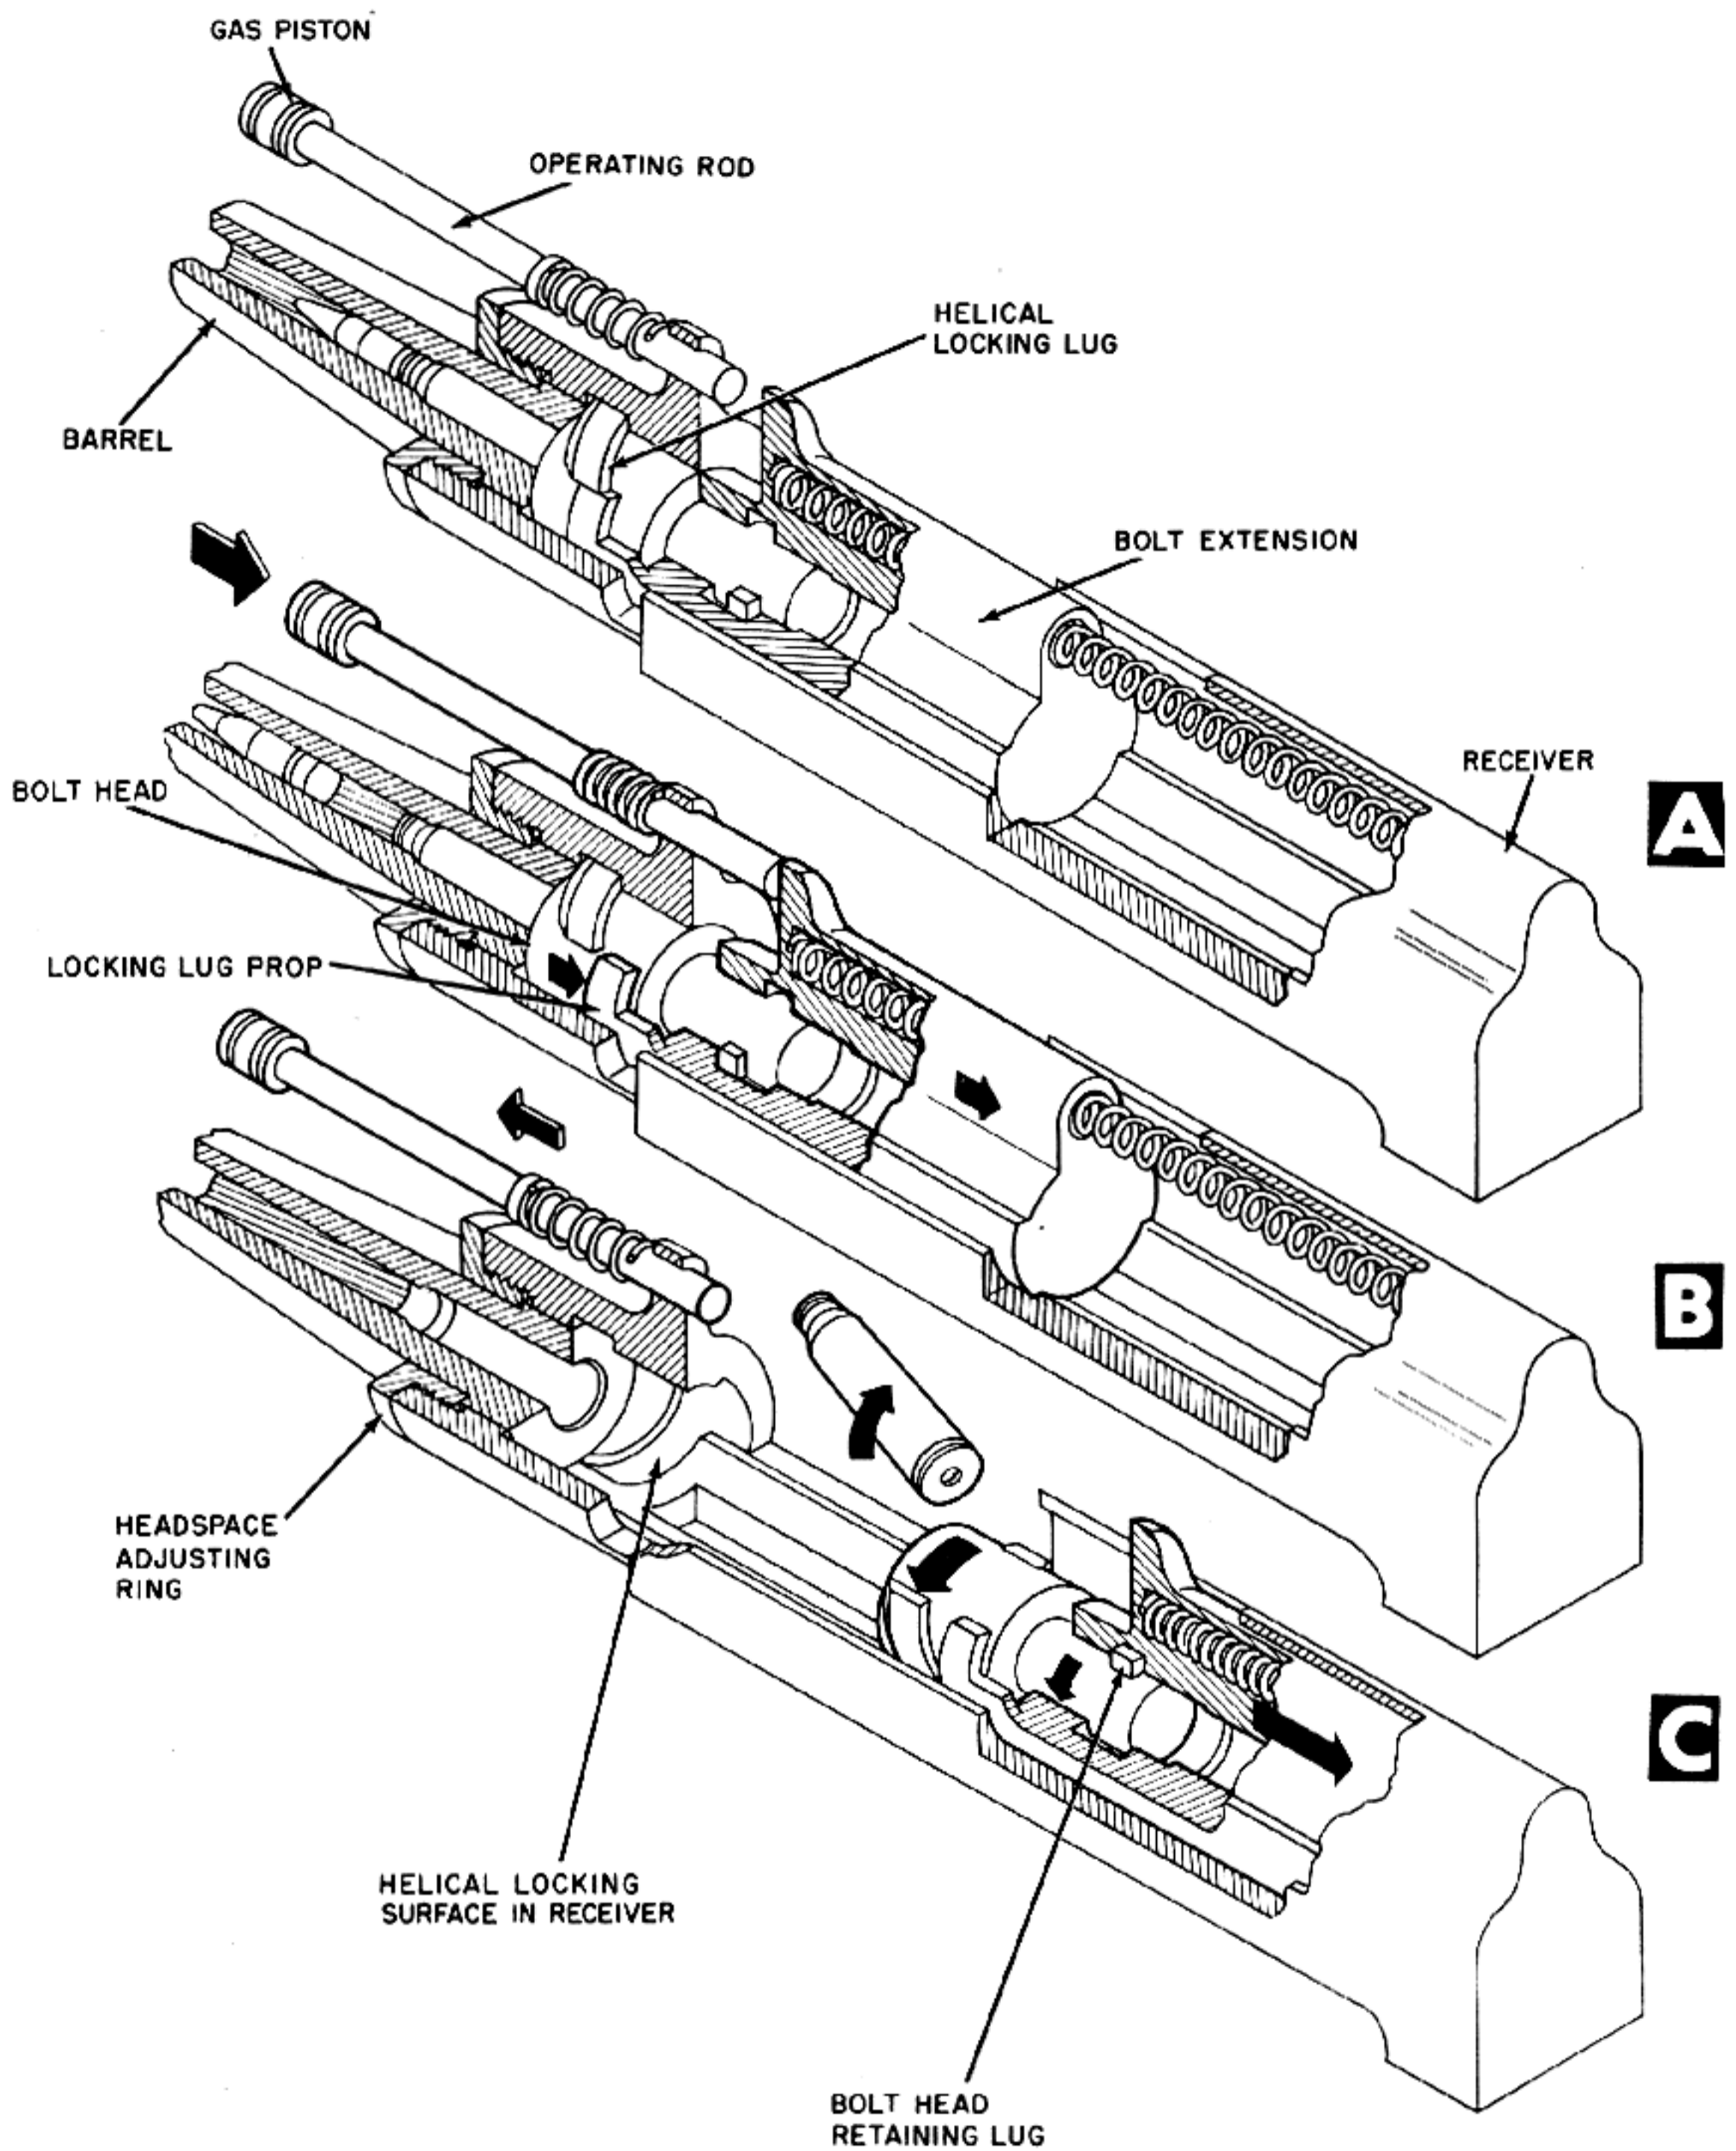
Gas Piston Actuates Locking Lug Prop. Gas Pressure Then Unlocks Bolt.
